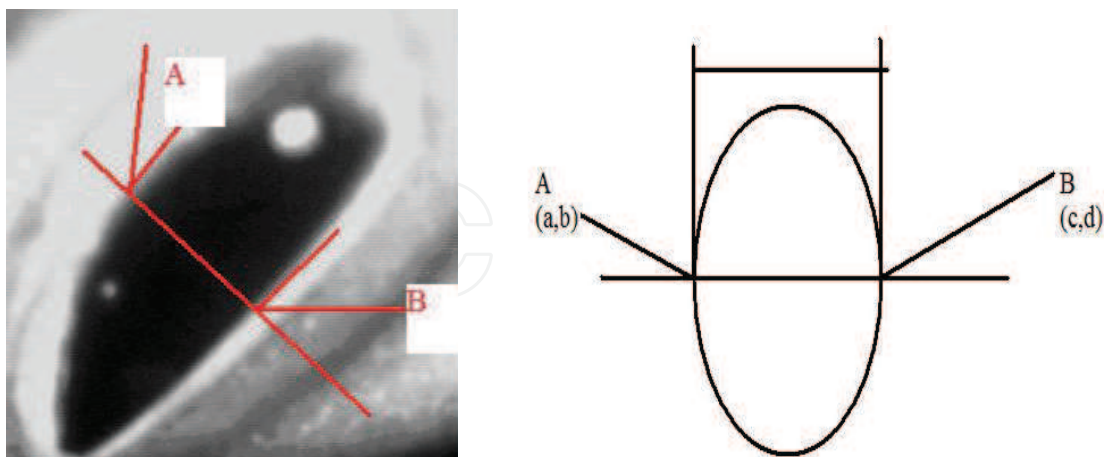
raw picture of Weld pool (a) Simple view of Edge Detection (b)
